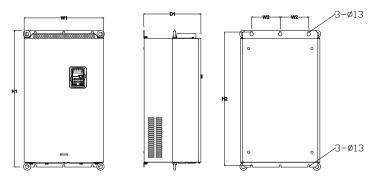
Wall installation of 660 V 160-220 kW VFDs
